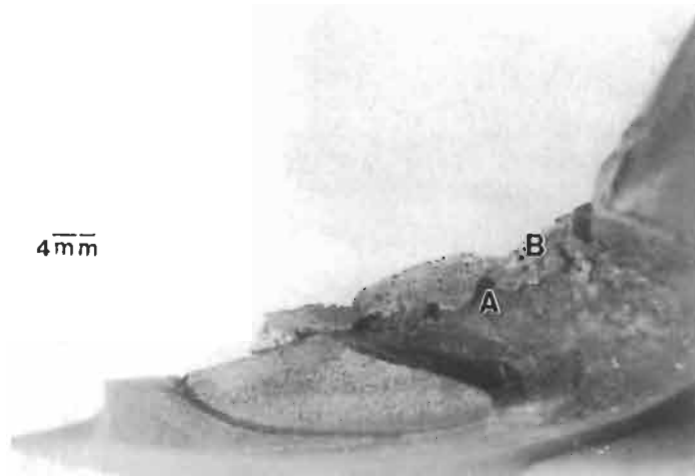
Low magnification image of the fractured surface of the blade showing physical discontinuities (marked as A) and holes (marked as B) in the braze joint.
